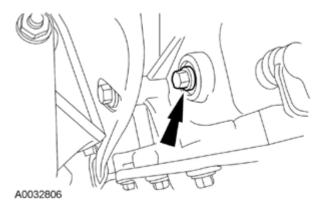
Locating Engine Plug Bolt Courtesy of FORD MOTOR CO.
